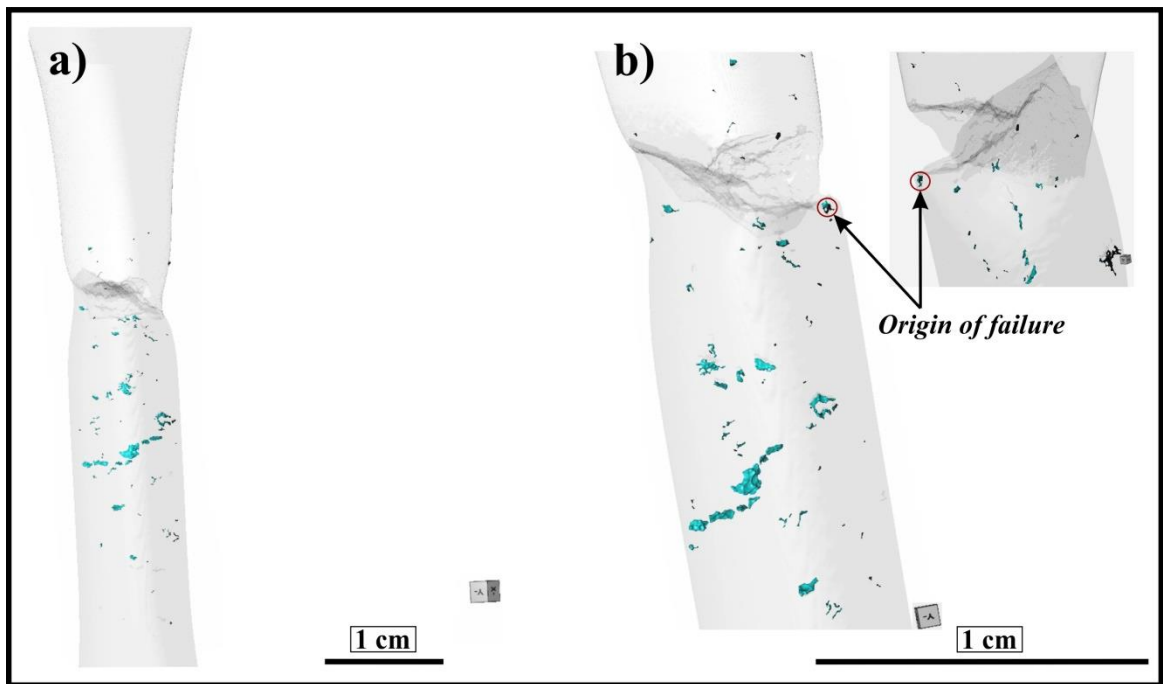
Virtual reassembly of ruptured fatigue sample parts
